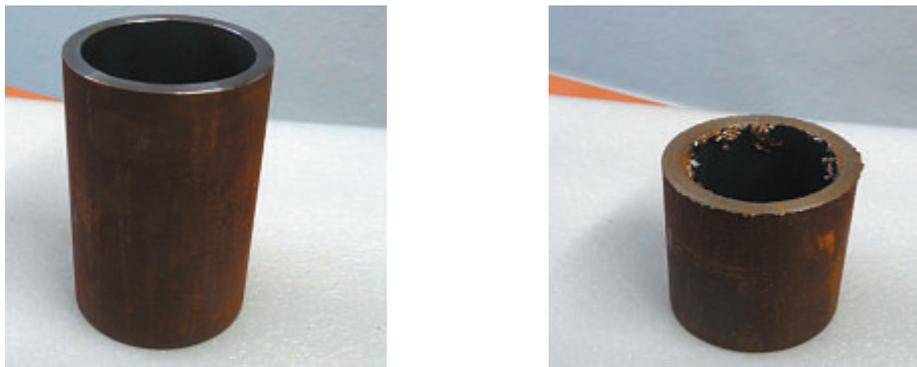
One of the casing samples L80 before milling (left) and after completing the milling process (right)
